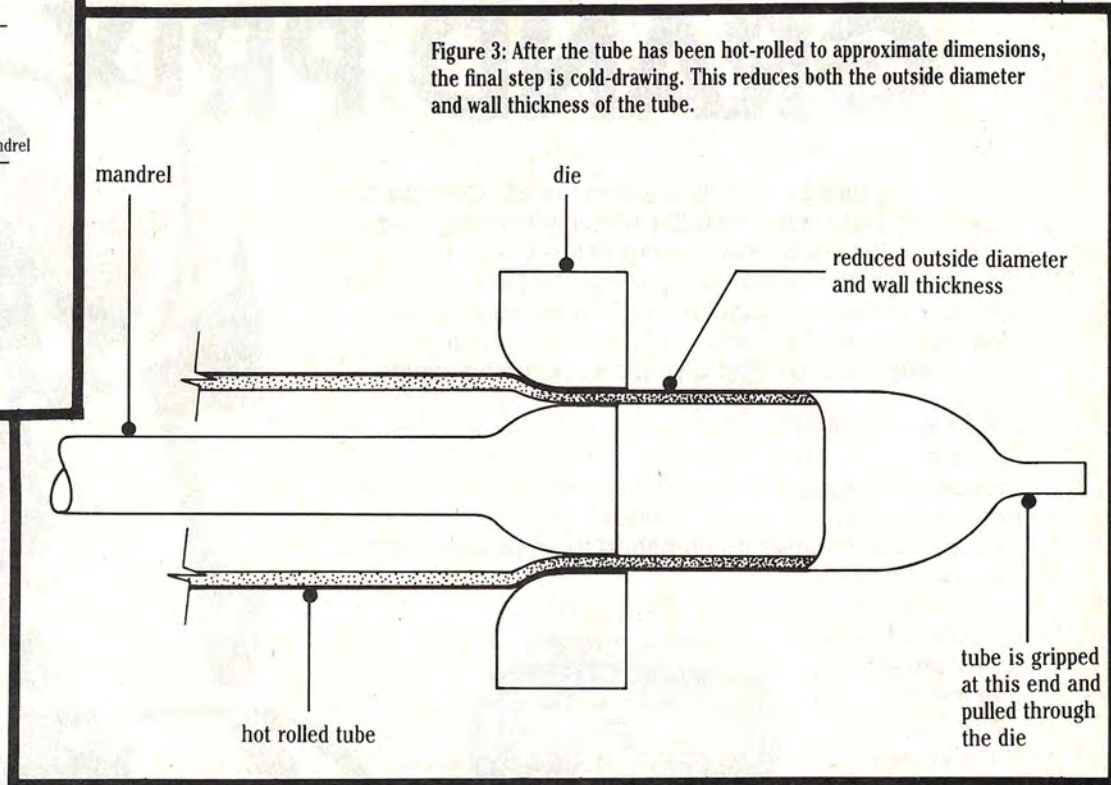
After the tube has been hot-rolled to approximate dimensions, the final step is cold-drawing. This reduces both the outside diameter and wall thickness of the tube.
